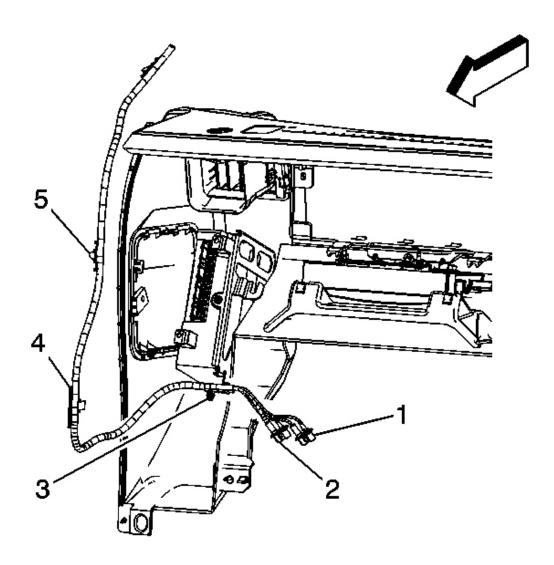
View Of Coax Cable & Components (UE1, U2K) Courtesy of GENERAL MOTORS CORP.
